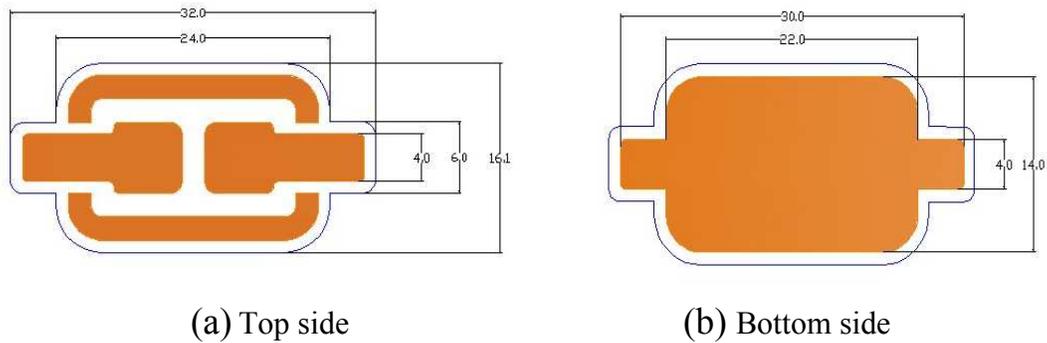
AutoCAD drawing of bottom substrate layout (unit: mm)
